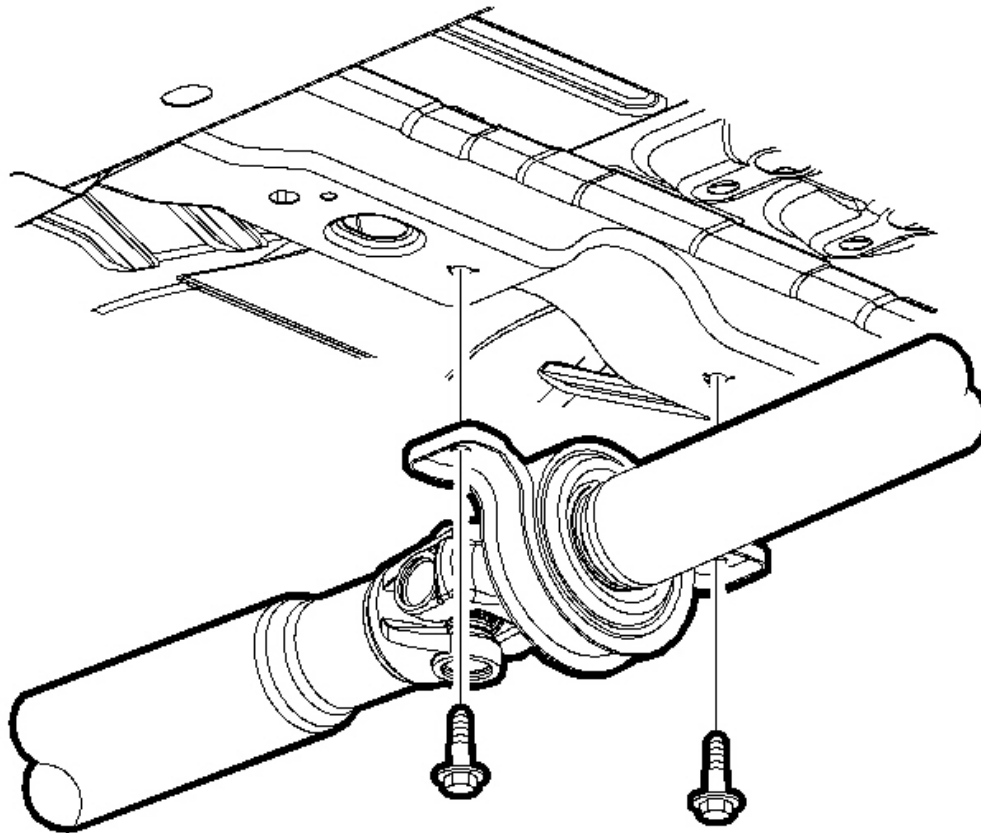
Installing Support Bearing Retainer Bolts On The Vehicle Underbody
